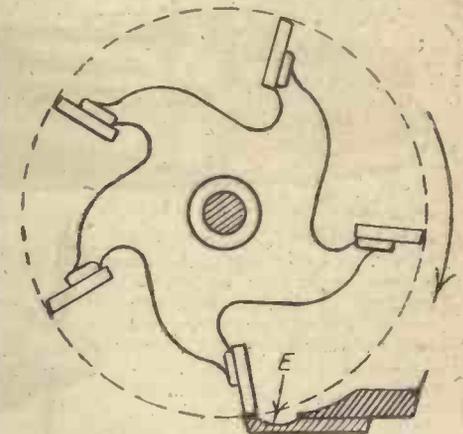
Illustrating a method of "lapping" the rotary blades.
